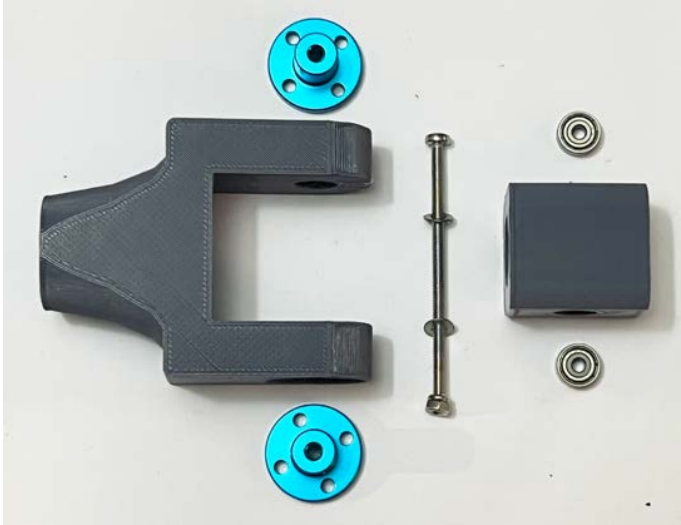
Components of the arm joints. The bearing component on the right-hand side hold miniature ball bearing races with a 3mm internal diameter. An M3 bolt is used as the joint shaft. When assembled, the joint bearing component locates between the two-sided support, illustrated on the left. This employs aluminum guides to hold the shaft. Washers are used to obtain suitable joint clearance.
